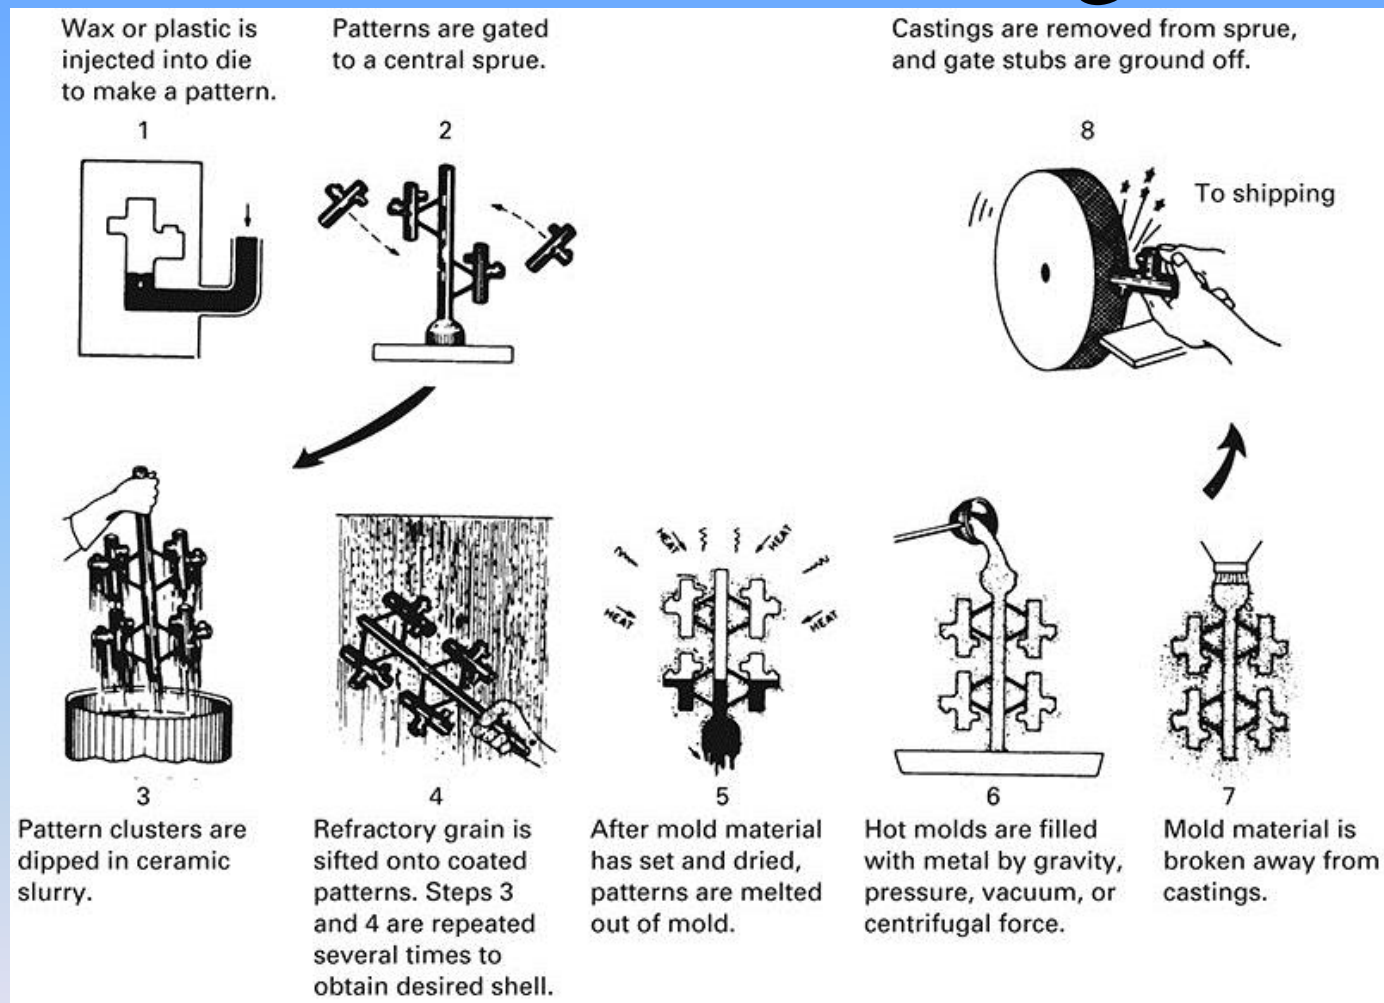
Investment-casting steps for the shell-casting procedure. (Courtesy of Investment Casting Institute, Dallas, TX.)
